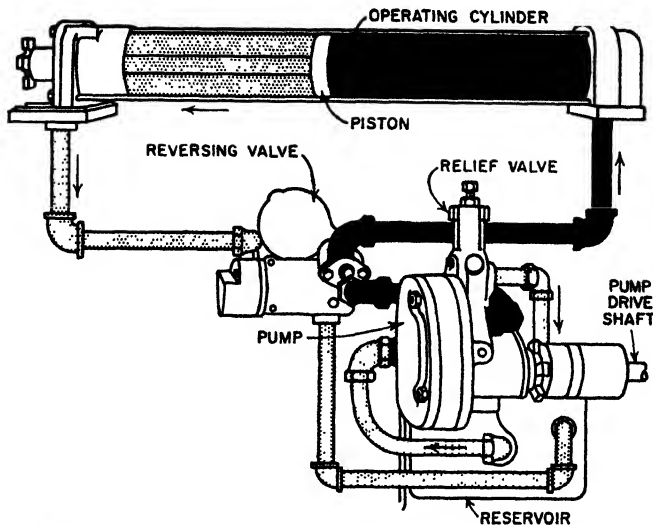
Essential parts of a hydraulic system. (The Socony-Vacuum Oil Company)
